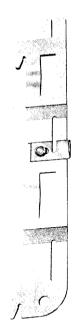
KS-20950, List 1 Cover Parking Tool
